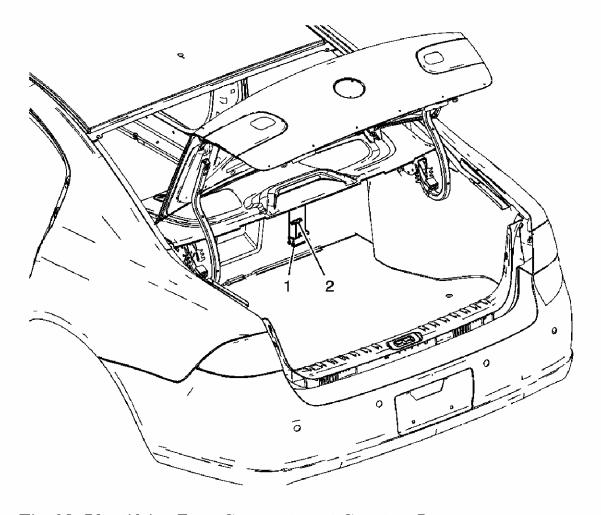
Identifying Rear Compartment Courtesy Lamp Courtesy of GENERAL MOTORS CORP.
